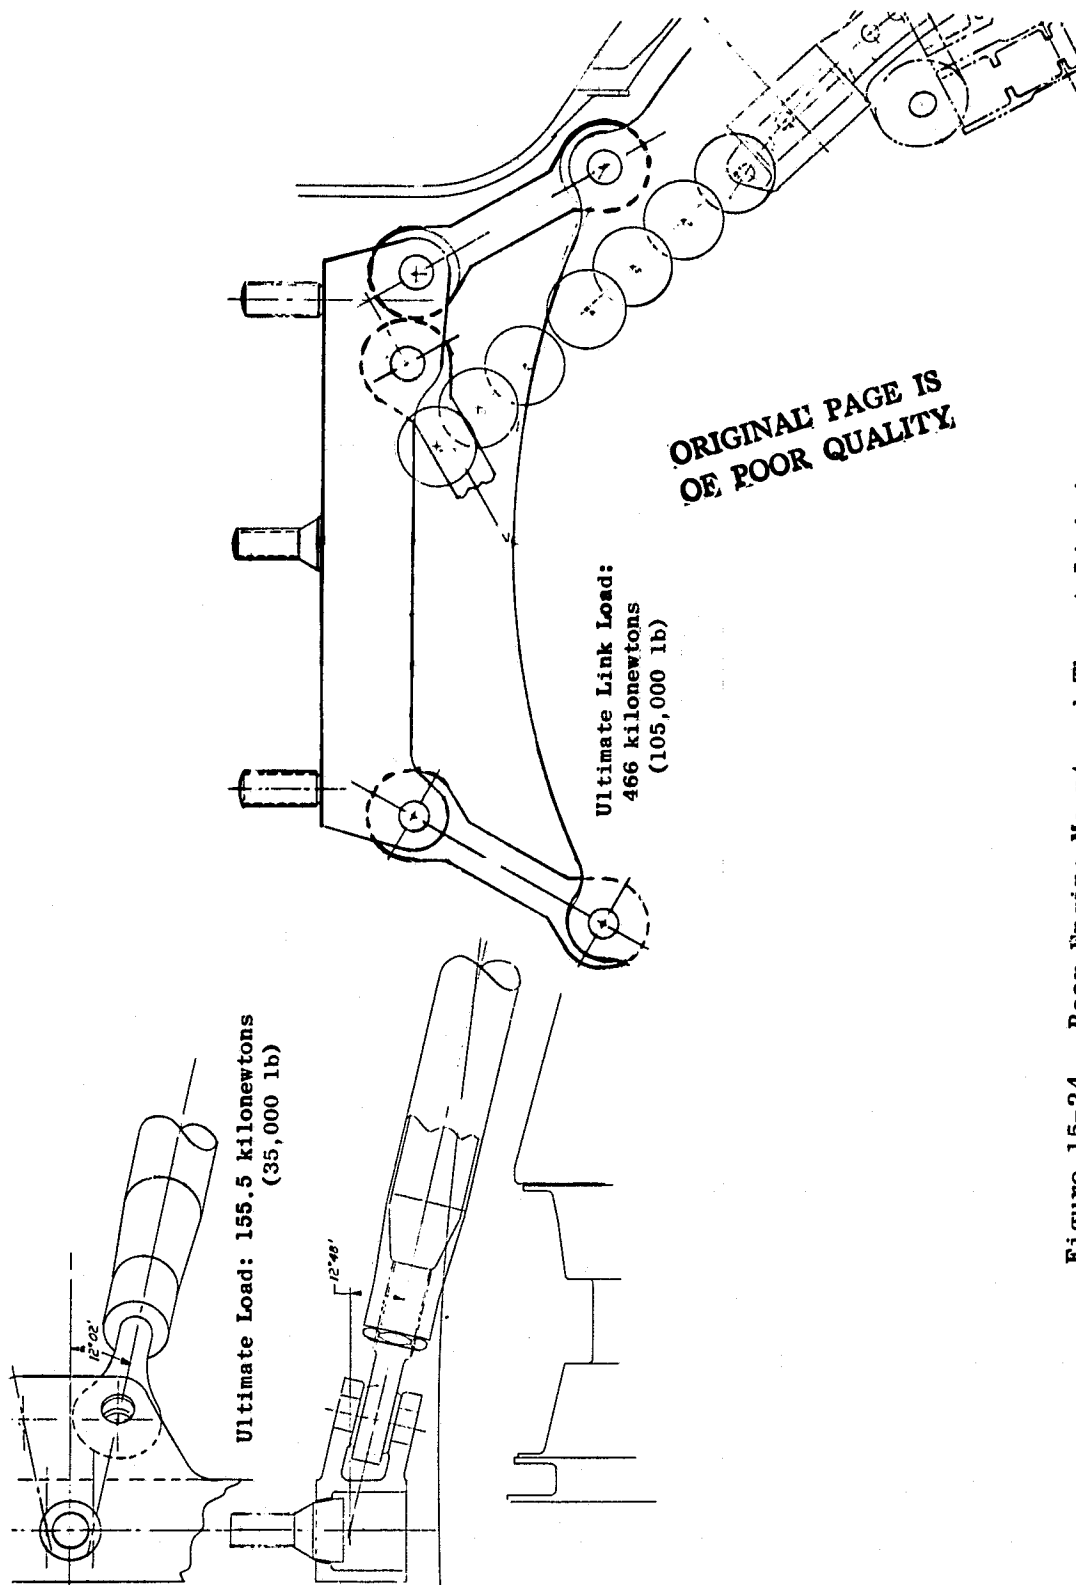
Rear Engine Mount and Thrust Link Assembly.
